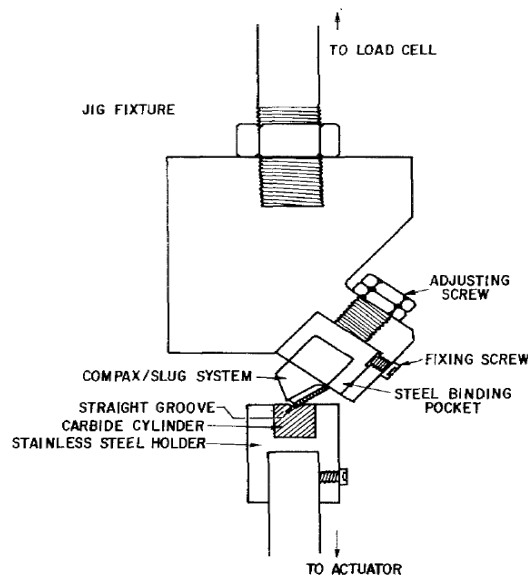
Schematic view of the fixture developed for the cyclic compression loading of PDC cutters [22].
